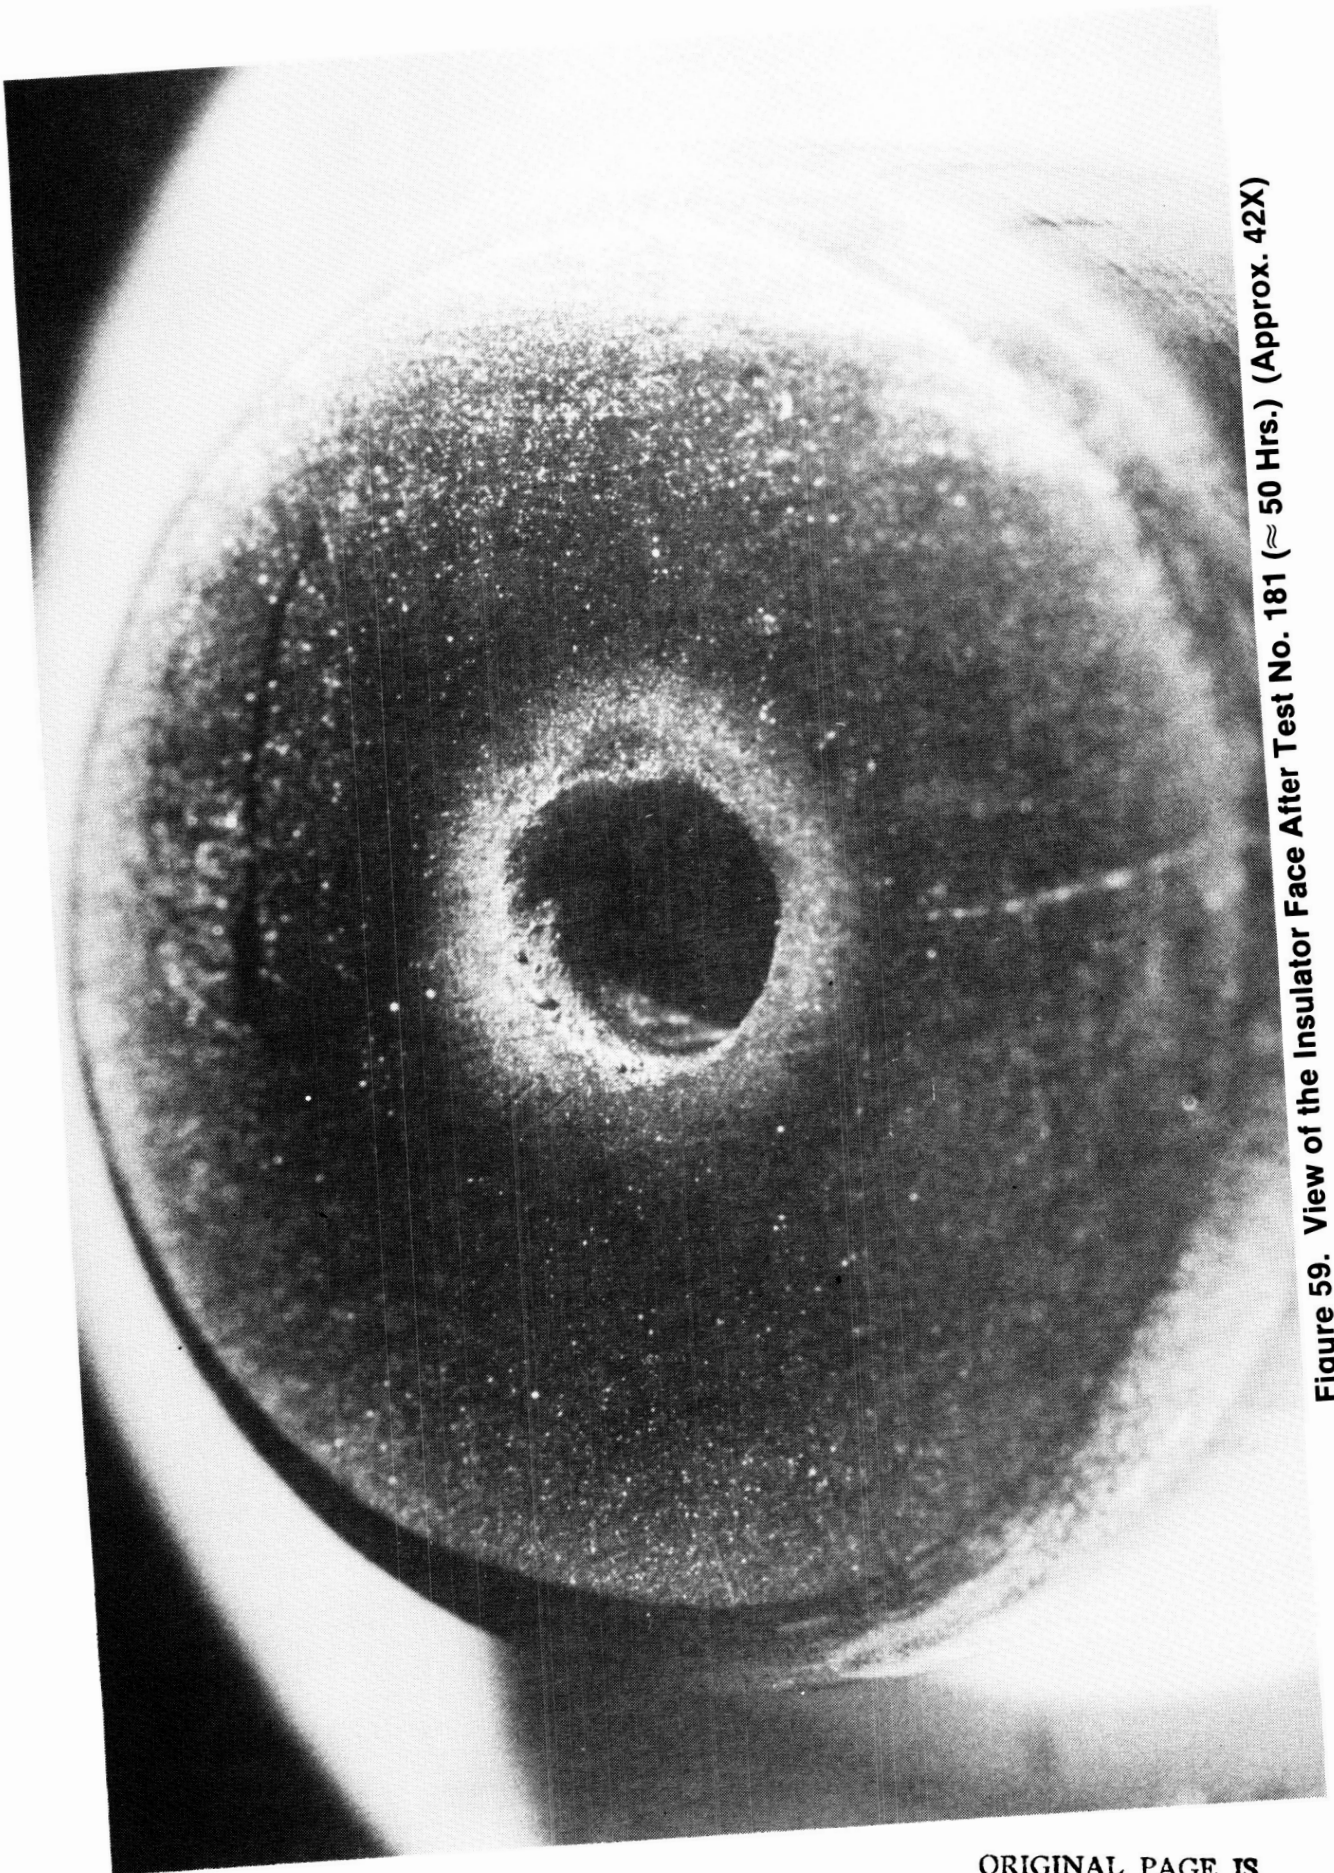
View of the Insulator Face After Test No. 181 ( $\approx$  50 Hrs.) (Approx. 42X)
